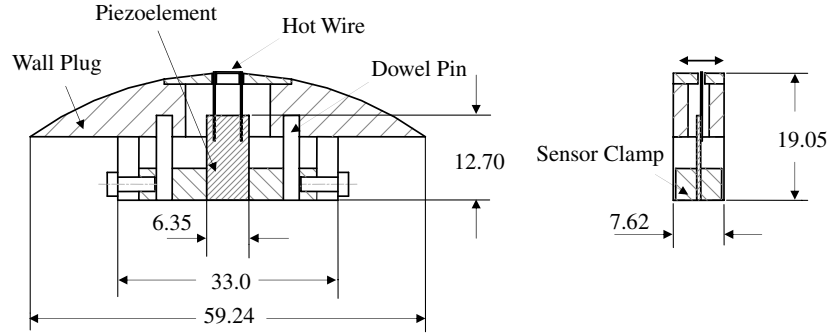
Drawing of the OHW sensor plug (dimensions in millimeters): end (left) and side (right) views.
